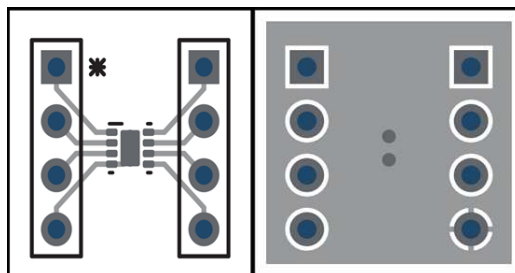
DSG package top layer (left) and bottom layer (right) PCB layout
